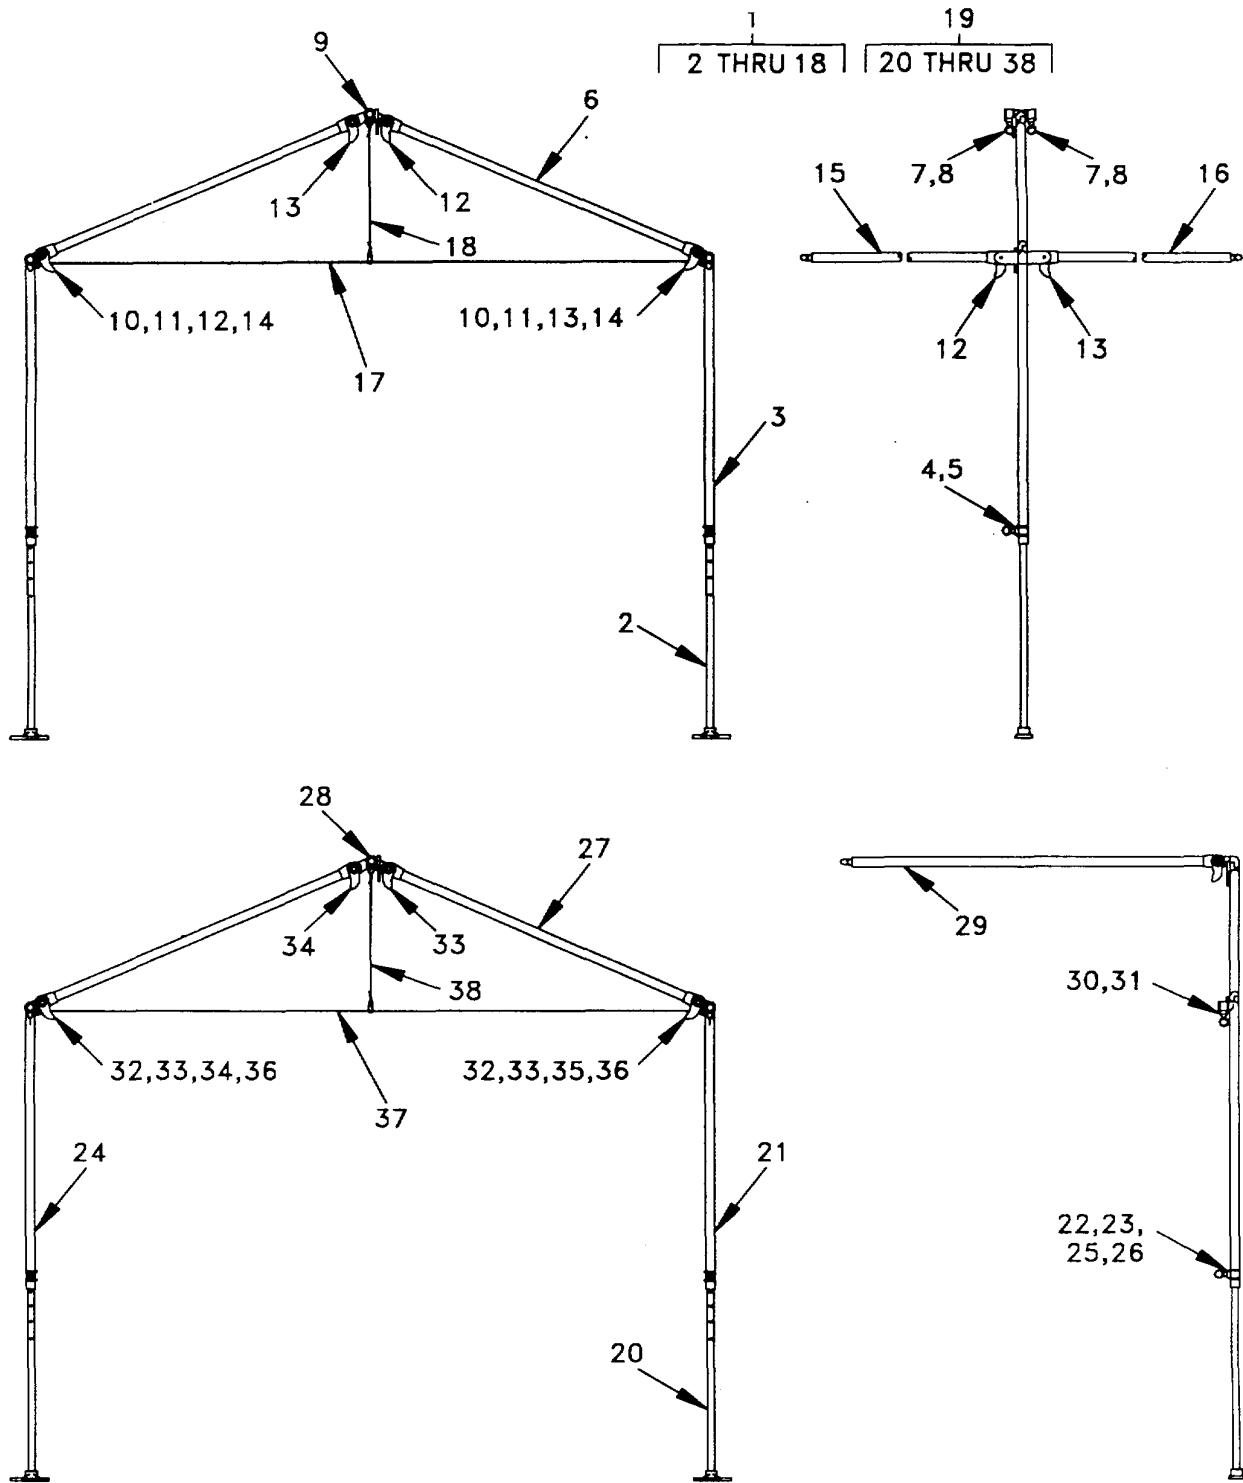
Tent Frame Assembly (Sheet 2 of 3)
